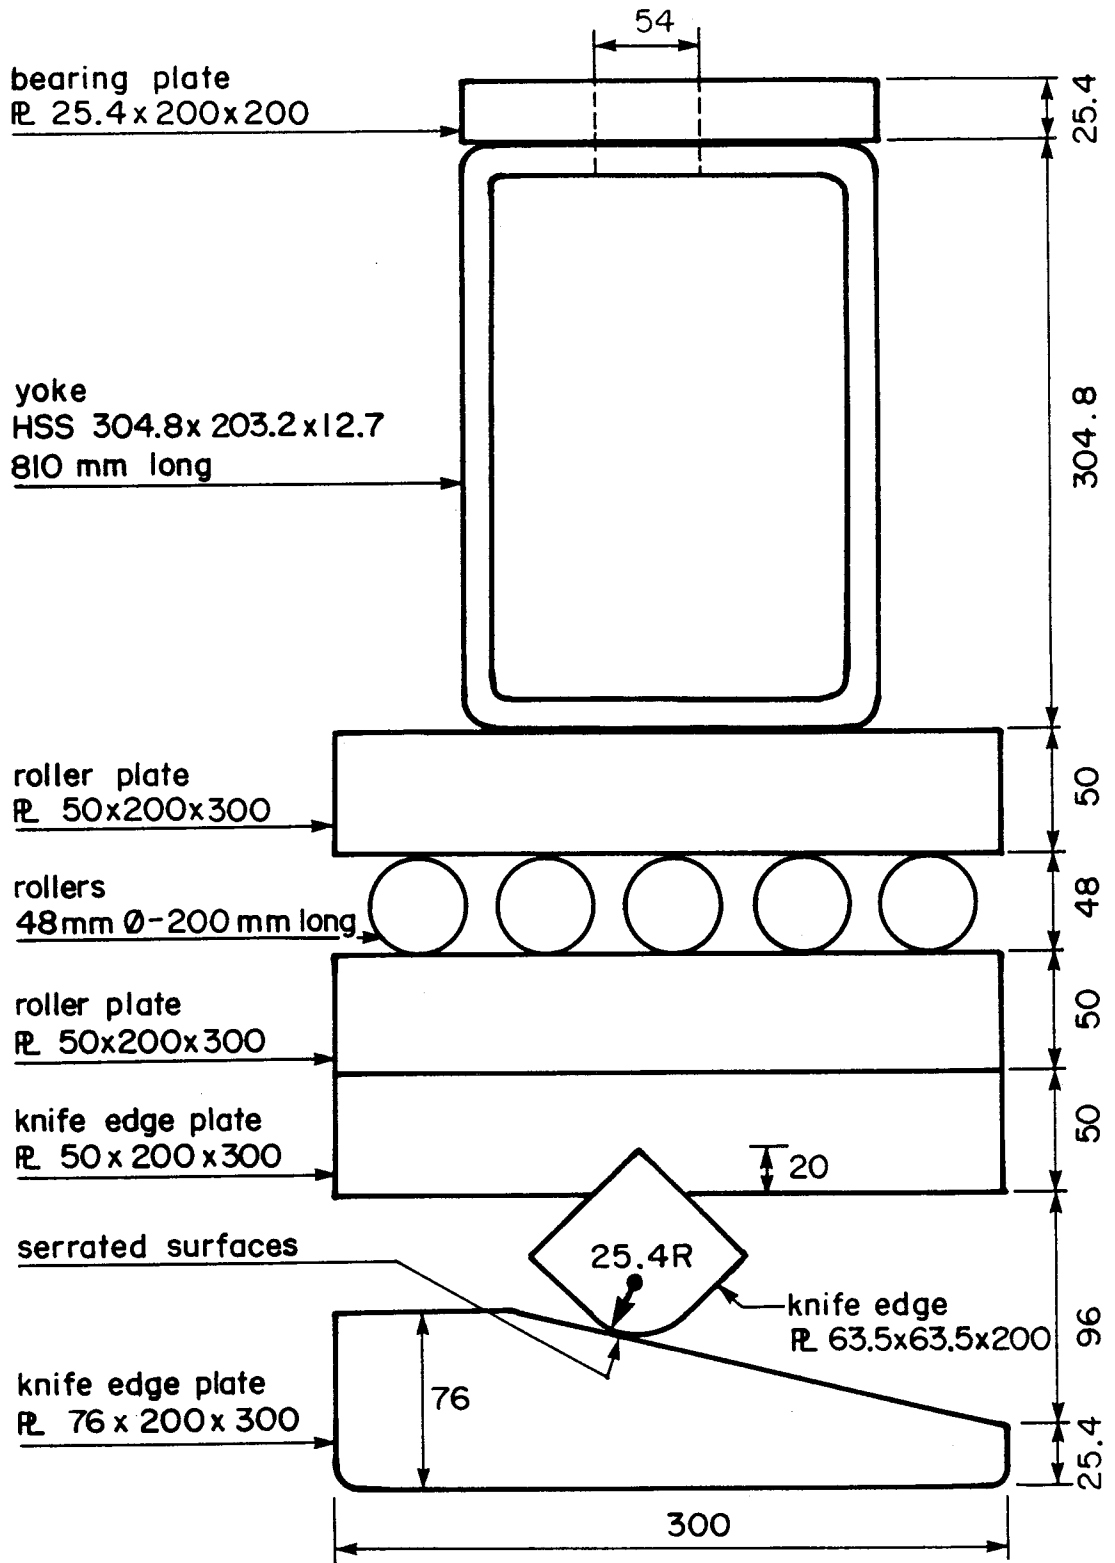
KNIFE EDGE ROLLER ASSEMBLY
